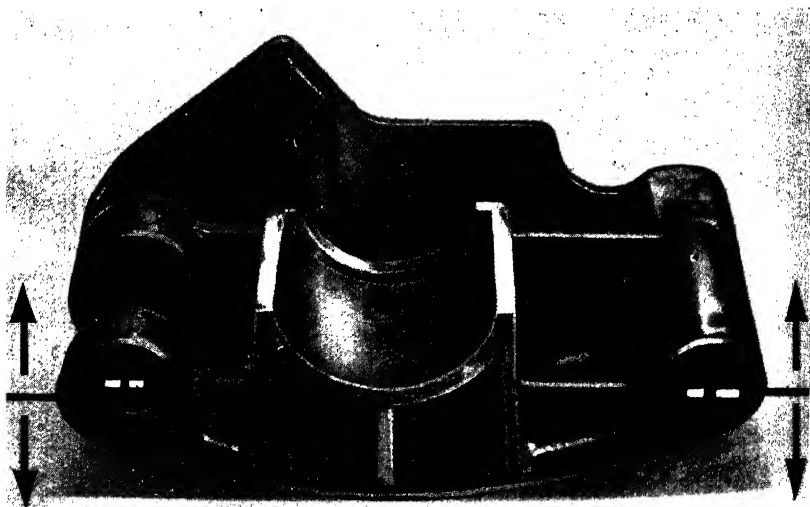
Aluminium alloy pressure die-casting indicating parting line
